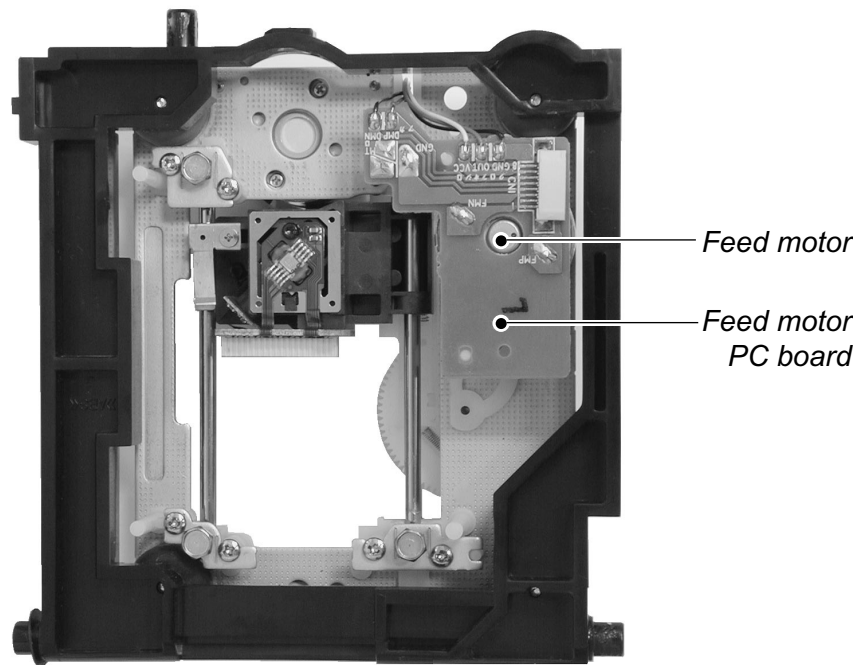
Pickup mechanism chassis assembly (Bottom side)
